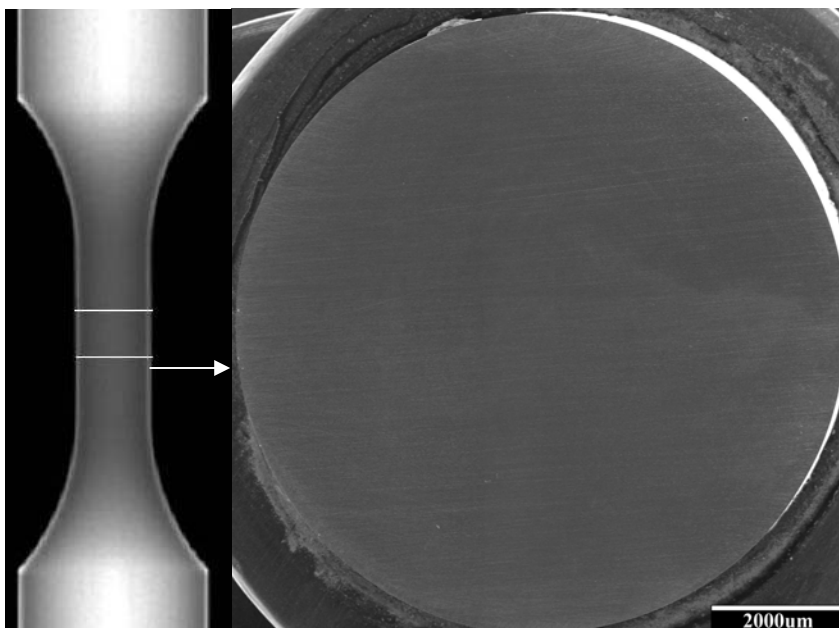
Radiograph with Indicated Fracture Zone and a Macroscopic View of a Truncated Cone Specimen with the Fracture Surface Ground Back (Specimen A6)
